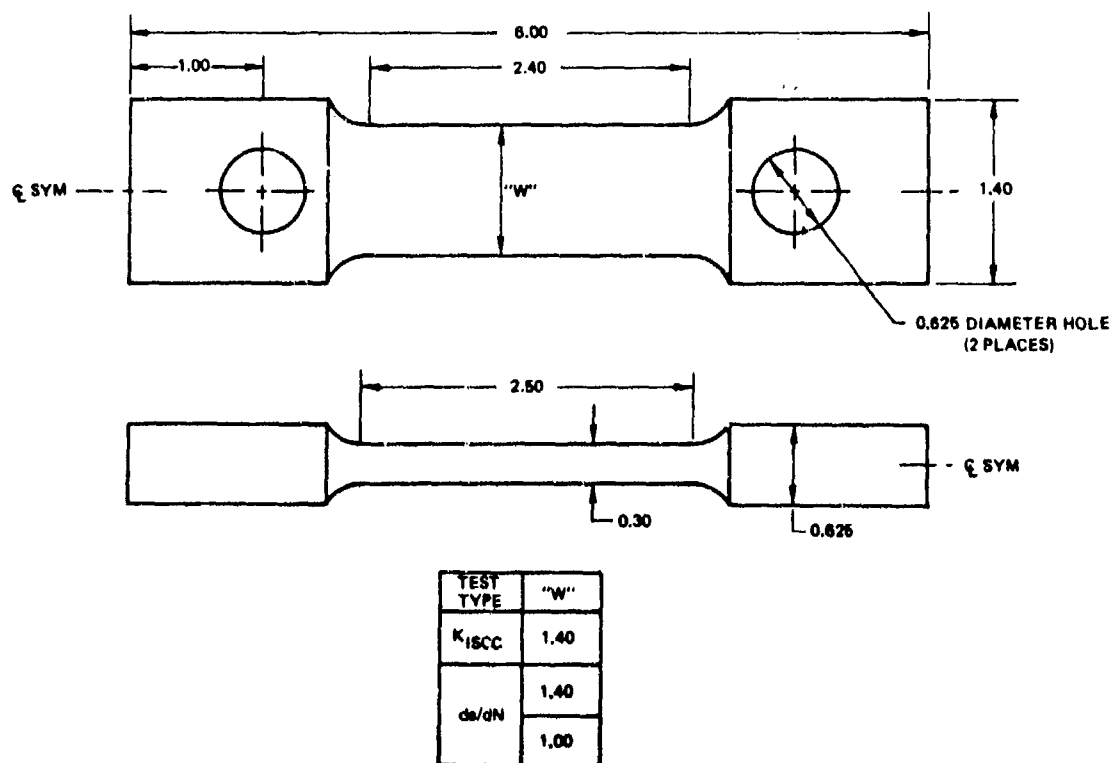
Surface-Flawed Specimen Configuration for 7075-T651 Aluminum Alloy K_{ISCC} and da/dN Testing
